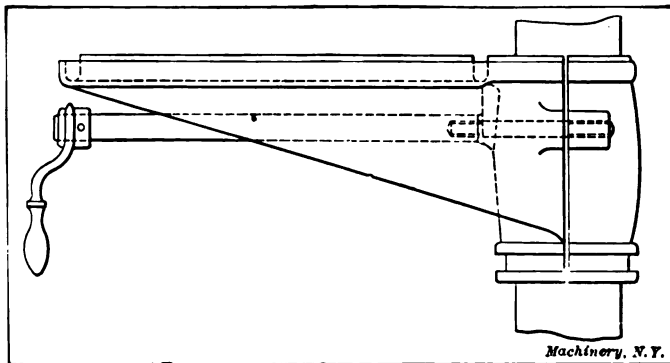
Clamping Handle carried out to Edge of Table for Convenience of Operation
